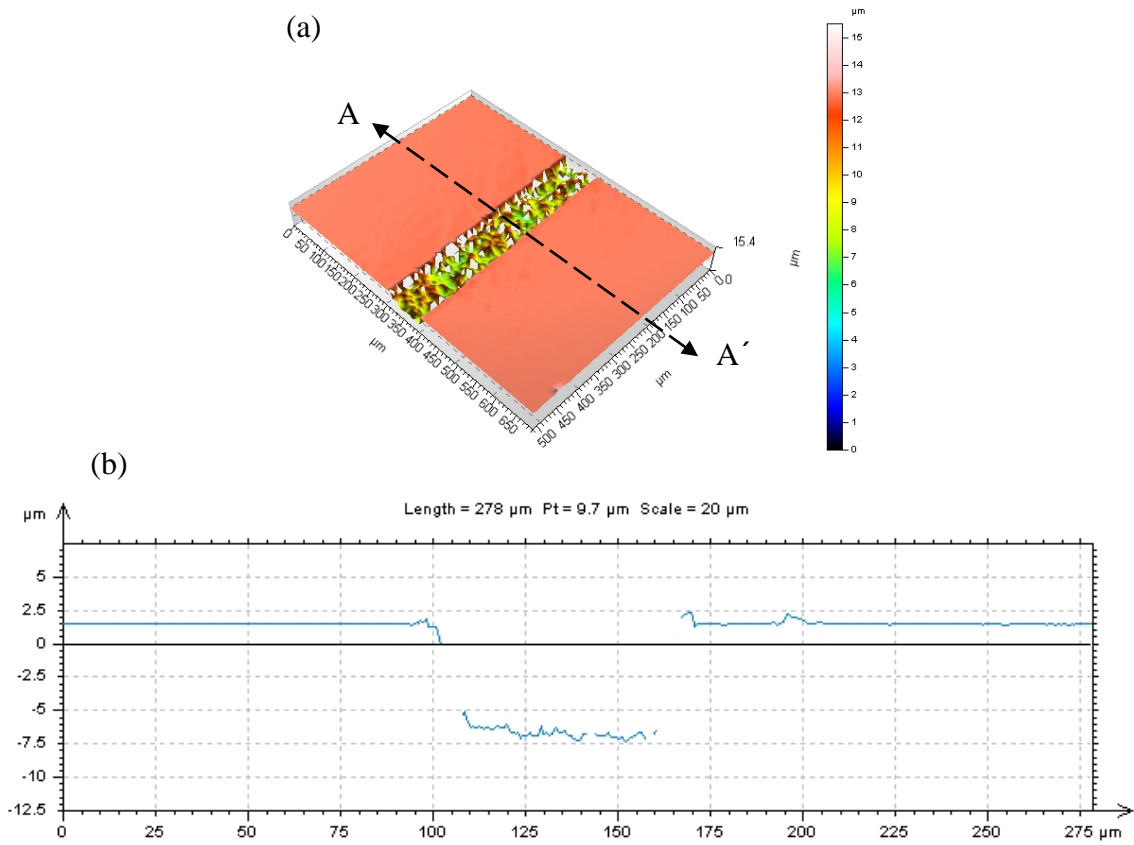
Machined groove with square mask (a) Surface map, (b) Profile A-A'
